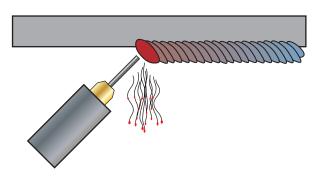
Weld gun position to control spatter buildup on an overhead weld.
